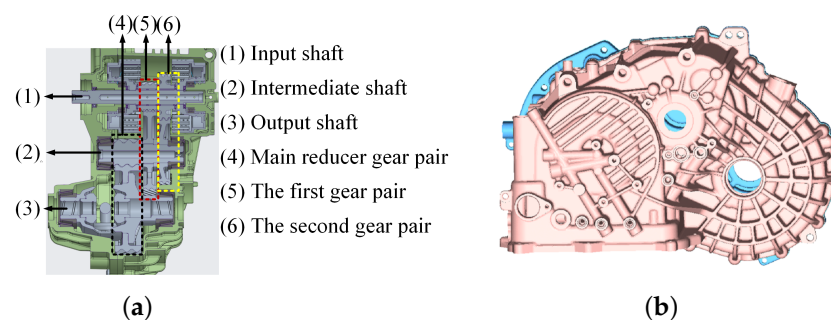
(a) Transmission 3D structure section view. (b) External structure of gearbox housing.
